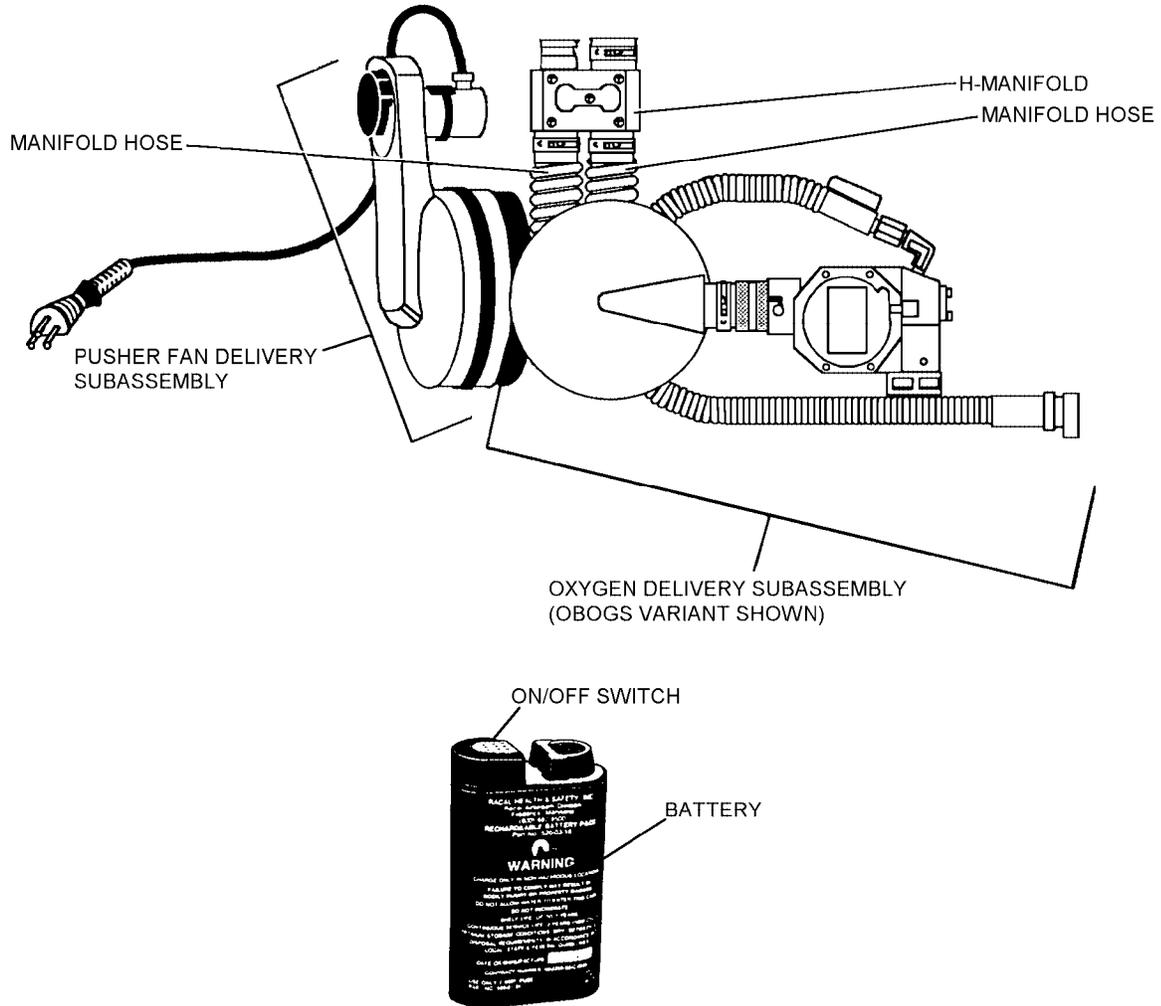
Lower Assembly ((V)3 Variant Shown)
